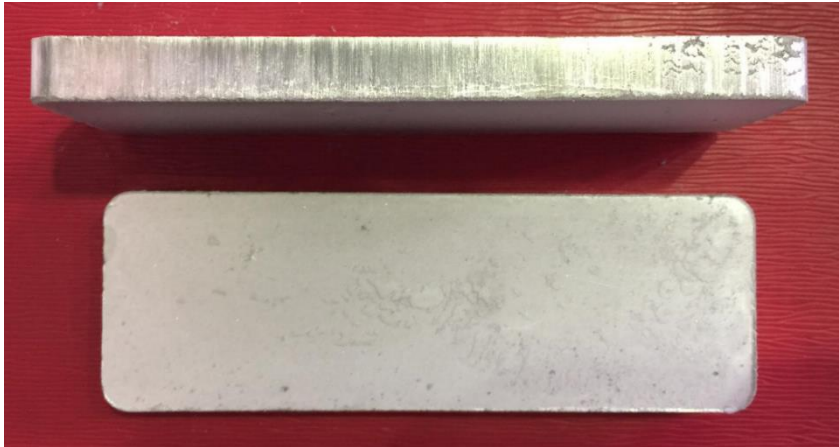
3-point bending test specimens after infiltrated by squeeze casting.
